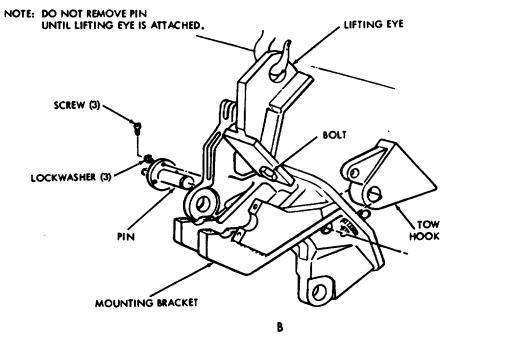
Removal or installation of blade and cylinder mounting bracket.
